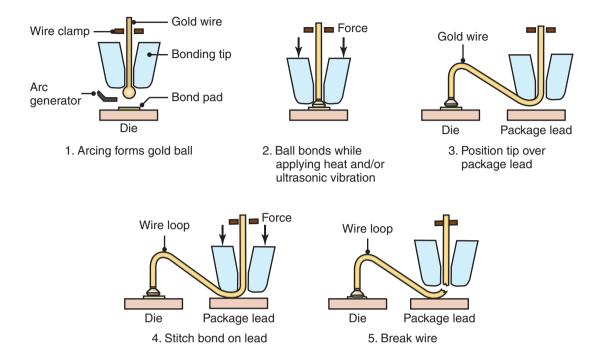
Schematic illustration of thermosonic welding of gold wires from package leads to bonding pads.
